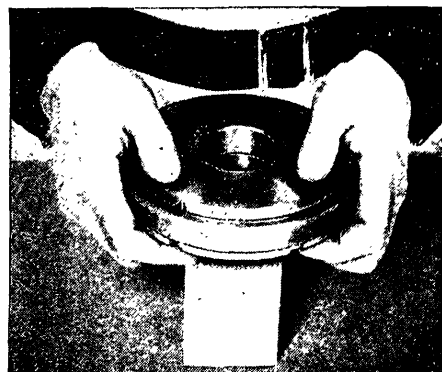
Remove annular piston from clutch drum by tapping clutch drum thrust face on wood block. Remove rubber seals and brass expanders in same manner as for front unit
